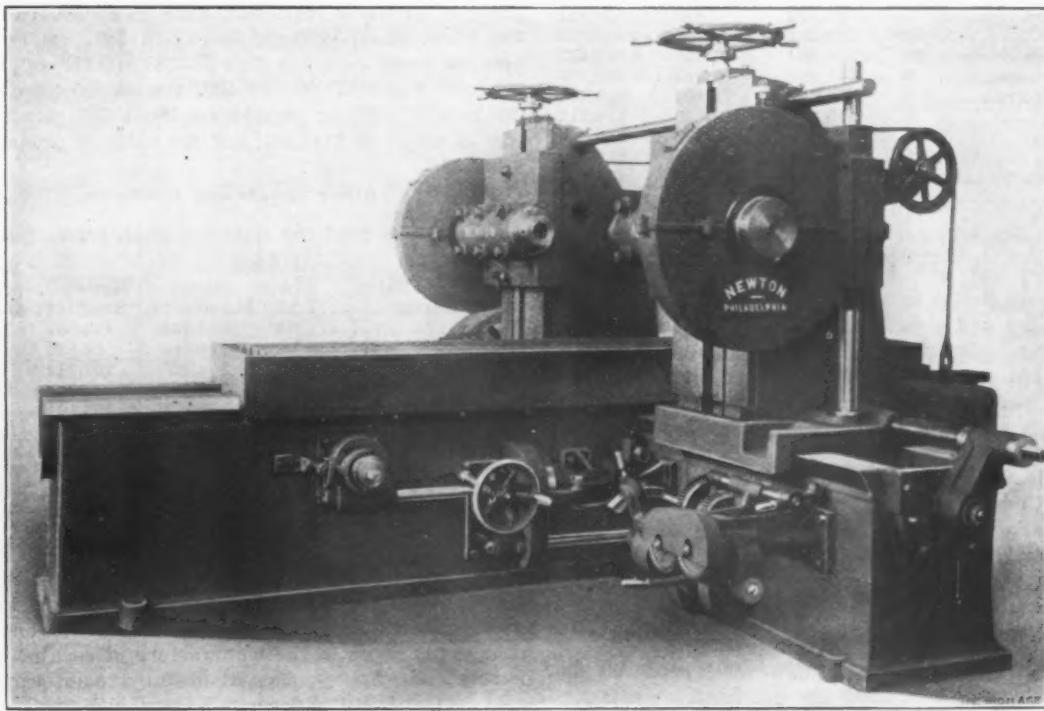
View Toward the Opposite Side of the Bed, Showing the Controlling Levers and Mechanism.
